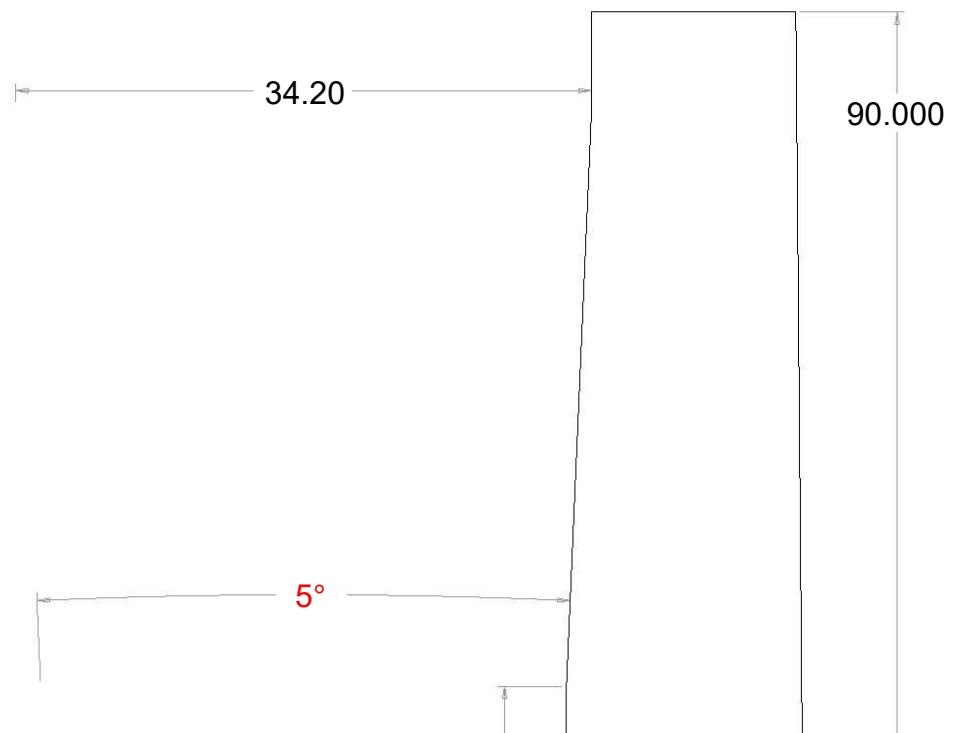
Creo Parametric sketch of the forming die lean angle in Sheet-bulk metal forming
